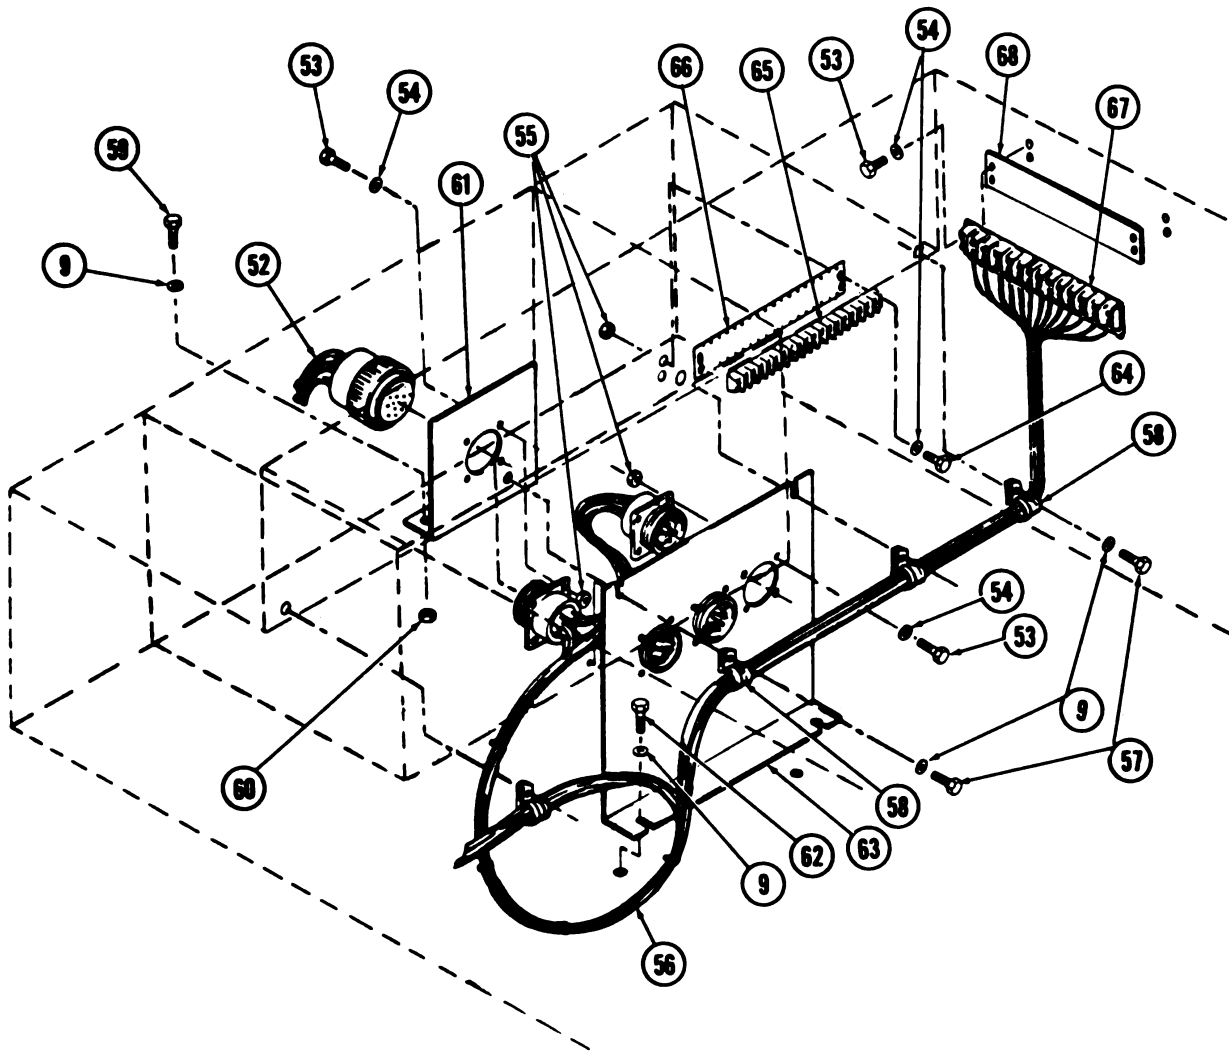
Wiring Harnesses and Cables (Sheet 7 of 10)
